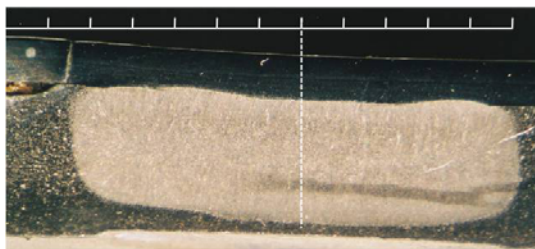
The fatigue crack location of fatigue test samples
